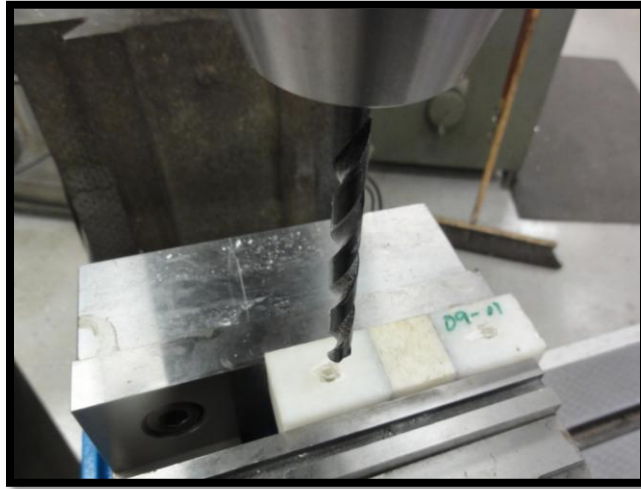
Holes drilled in end tabs to connect to test fixture using Bridgeport Mill
